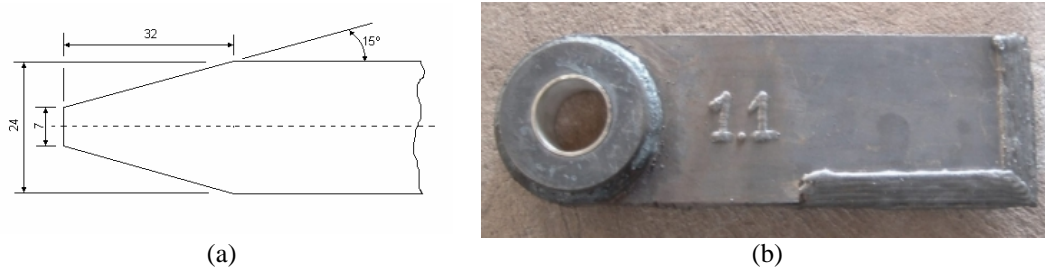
Views of a shredder knife. (a) profile and dimensions (mm) of the bevel; (b) Photograph of a knife.
